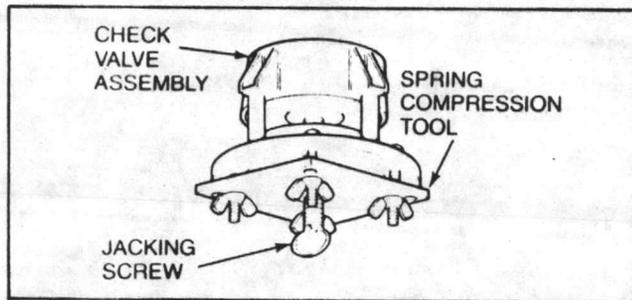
CLEANING 1 1/4", 1 1/2" AND 2" CHECK VALVE
